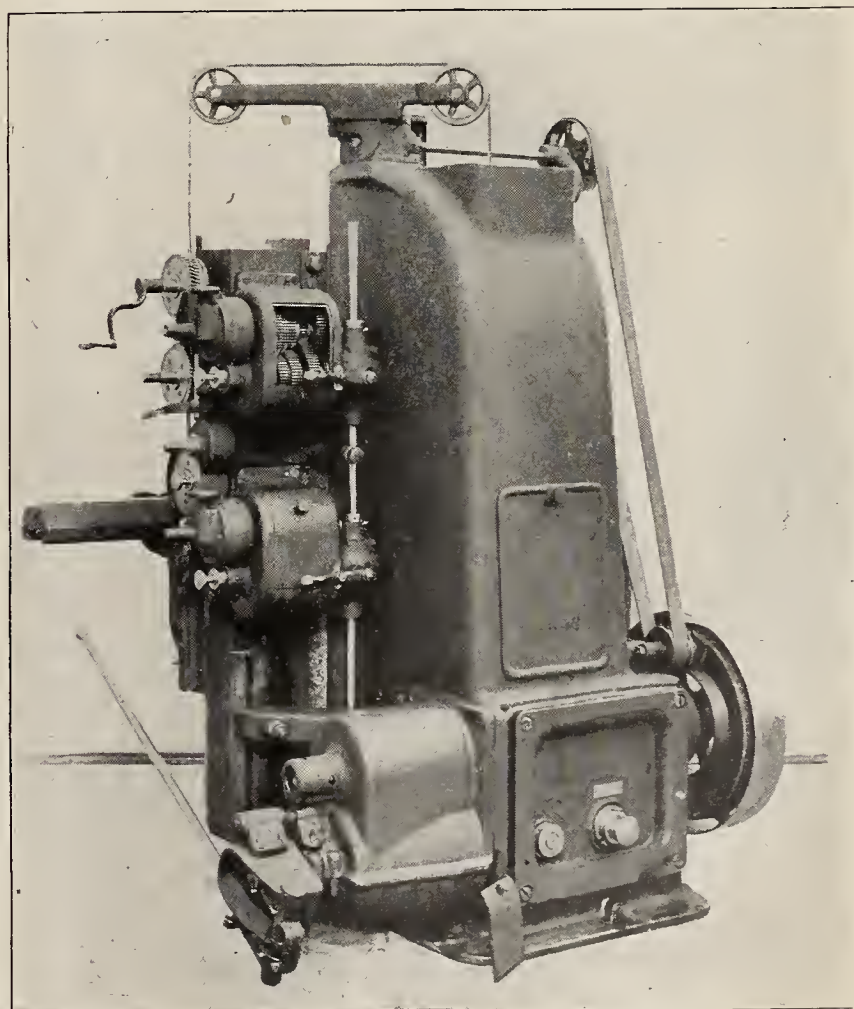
REAR VIEW BULLARD MACHINE TOOL CO.'S VERTICAL TURRET LATHE.
